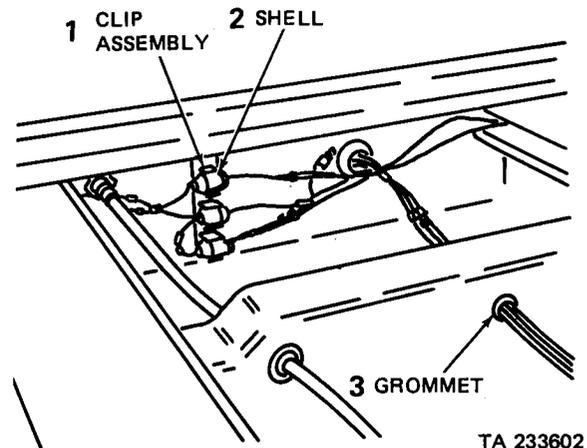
Electrical connections at rear of front crossmember (M127 and M127A1)
